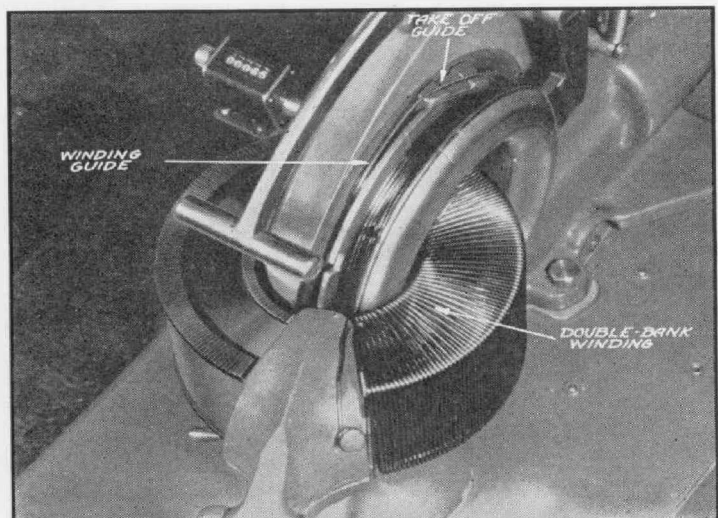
Core and winding plate assembly are inserted with winding head assembly opened. Note particularly the concentricity of the winding ring about the core section.
